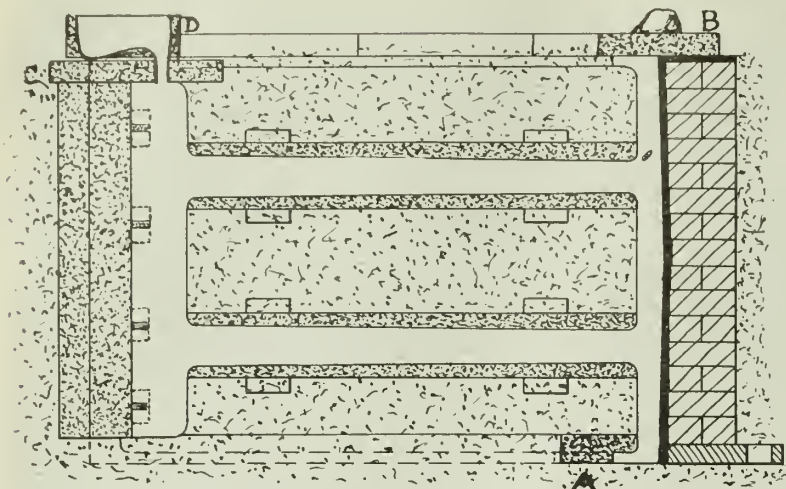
SHOWING LAYOUT OF ALL PARTS OF THE MOLD
